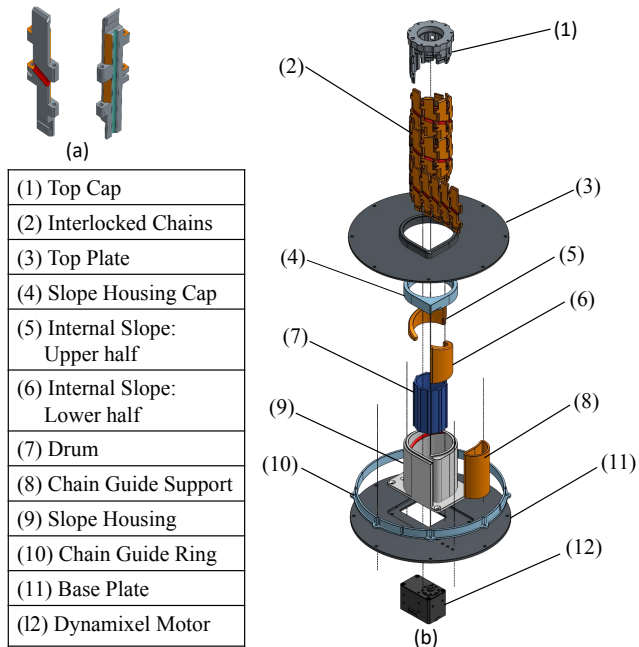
(a) Front and Back isometric view of chain design (b) Exploded view of the full Chain Actuator design with its components
